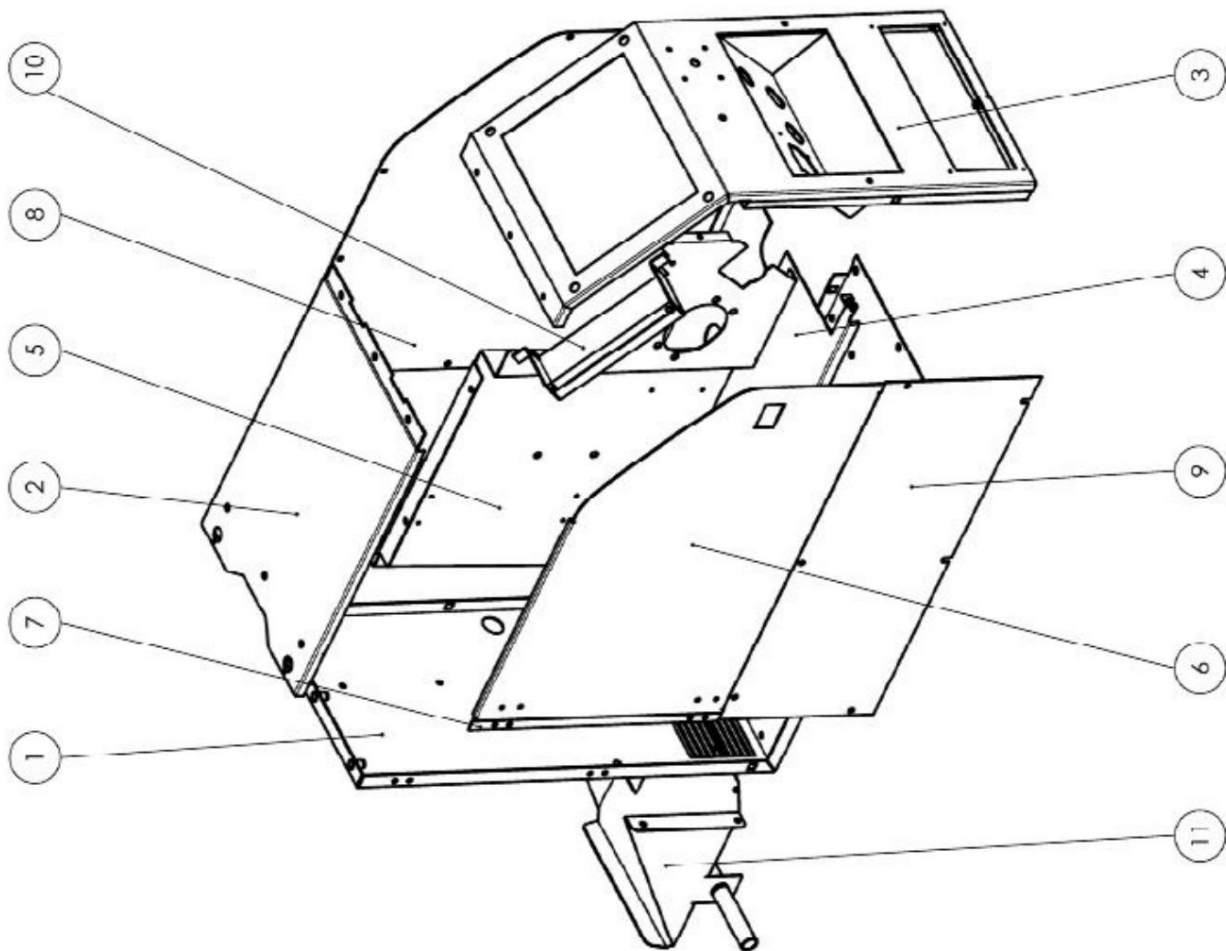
Spare parts drawing 1 - Housing PRO-MIG ARC 251, 311, 351
